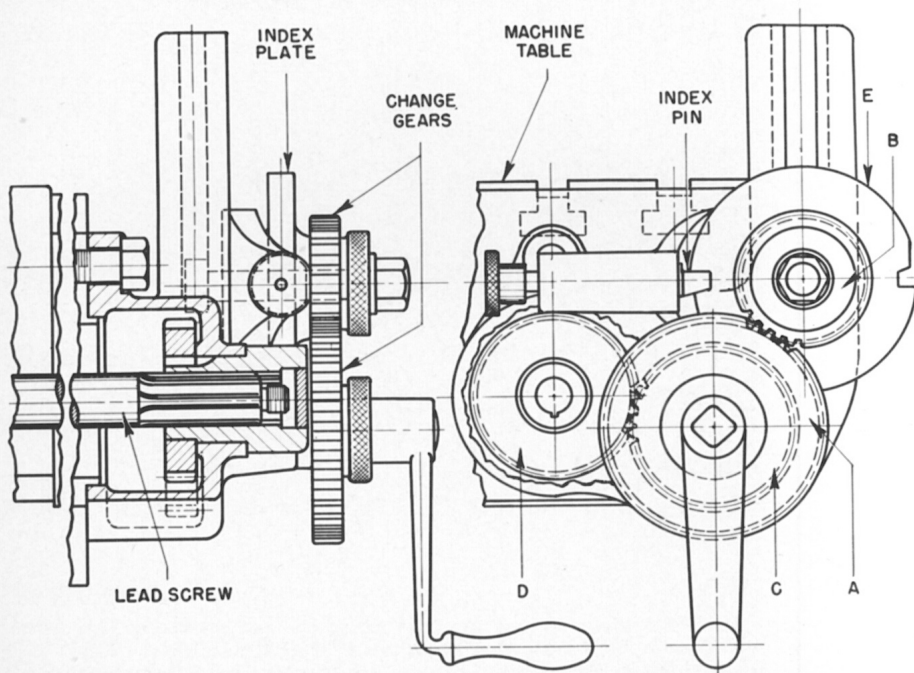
Rack indexing attachment mounted on the right end of a milling machine table.
